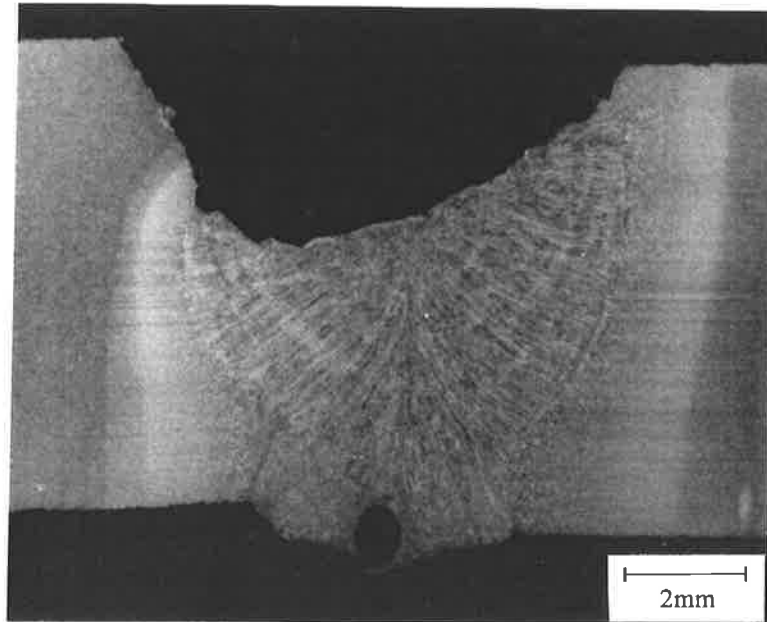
Macrograph of a weld showing the root and hot passes with a hollow bead in the reinforcement. Welding conditions: weld travel speed 410mm/min (the welding current and voltage were not recorded), root gap 0.6mm and root face 2.5mm.
